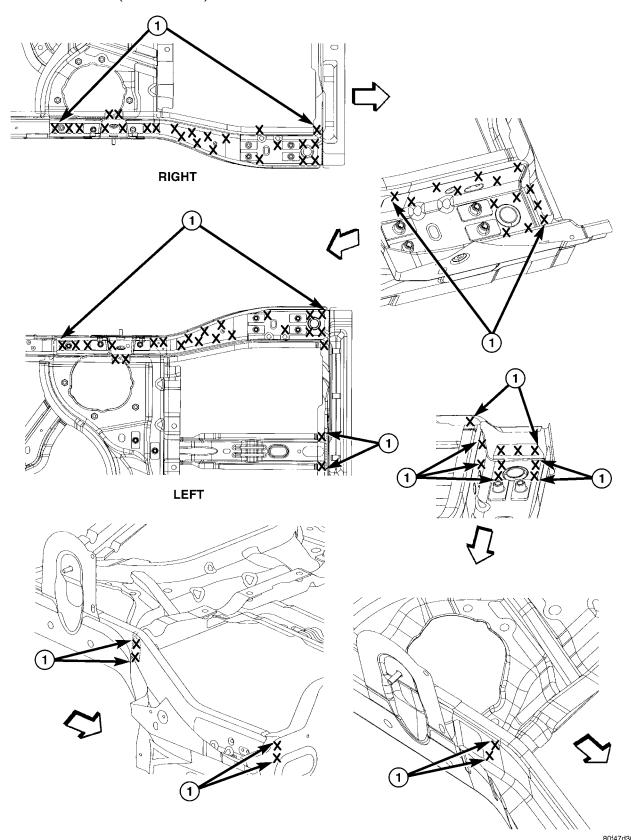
REAR FLOOR PAN SIDE RAIL TO REAR FLOOR PAN CROSSMEMBER AND REAR FLOOR PAN FRONT KICK UP CROSSMEMBER
